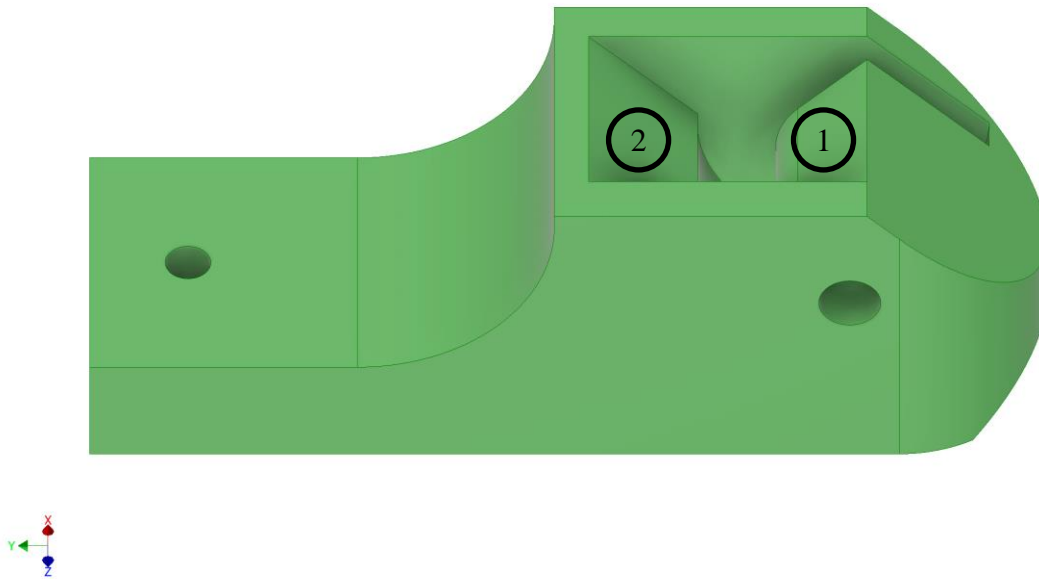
Wireframe drawing of leg hinge – Transient between Position 1 and 2.
